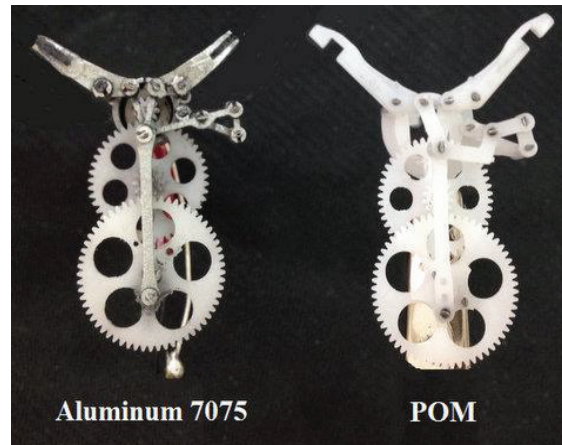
FBL with Evans mechanism assembly, using Al-alloy7075 by EDWC, and POM by PIM; All the gears are made by PIM.
